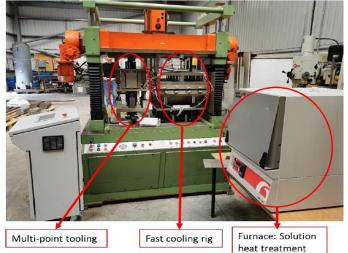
Setup of the Multi-point hot forming trials with fast cooling system developed.
